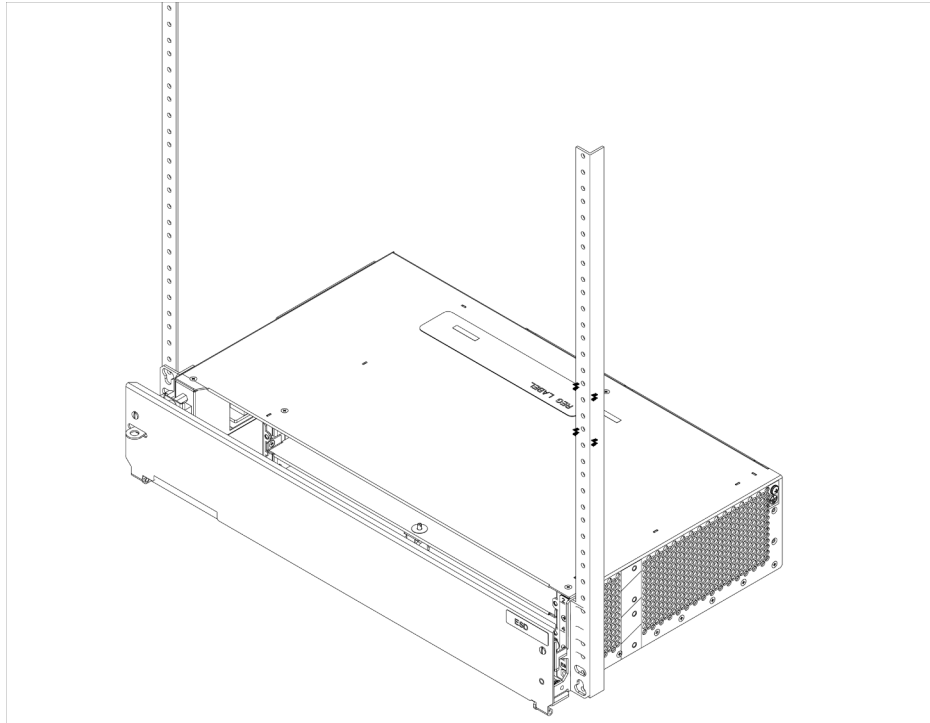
BTI 7060 465-mm (19-inch) ETSI rack, front-mount position with cover and bracket assembly
